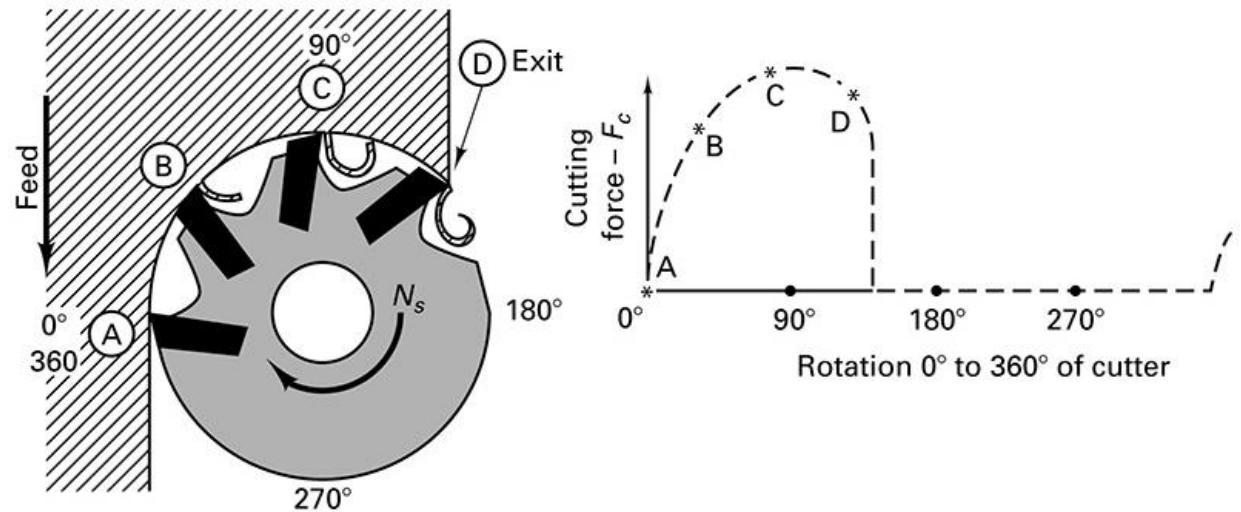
Conventional face milling (left) with cutting force diagram for F_c (right) showing the interrupted nature of the process. (From *Metal Cutting Principles, 2nd ed.*, Ingersoll Cutting Tool Company.)
